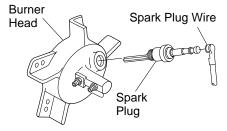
Spark Plug Removal, 110/ 150,000 BTU/Hr Models
